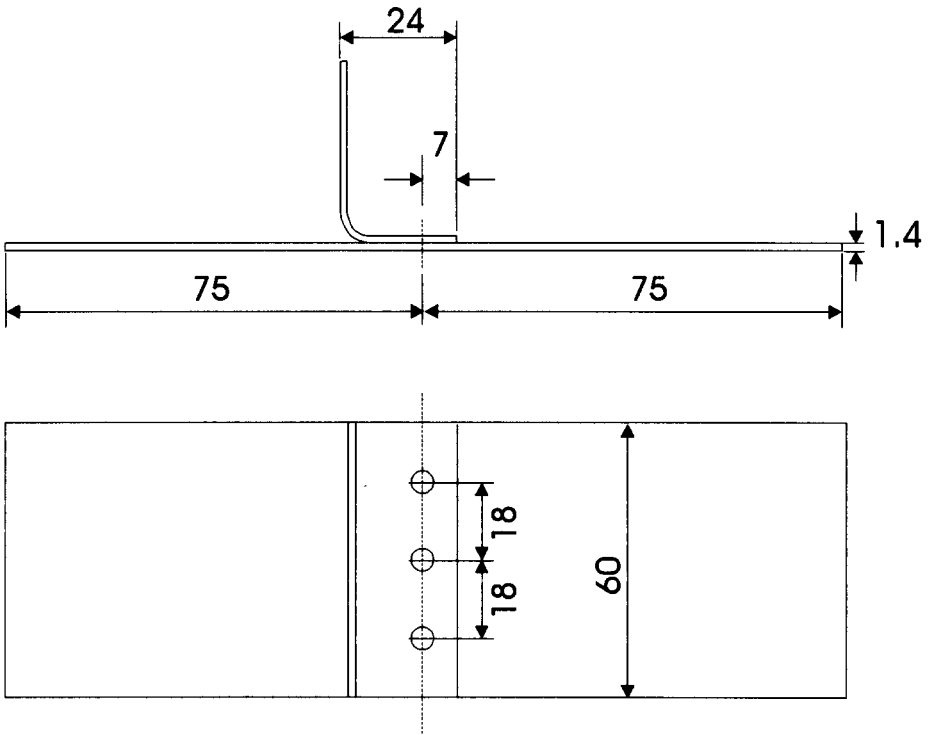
The Dimension of a GLARE Tee-Coupon in mm
